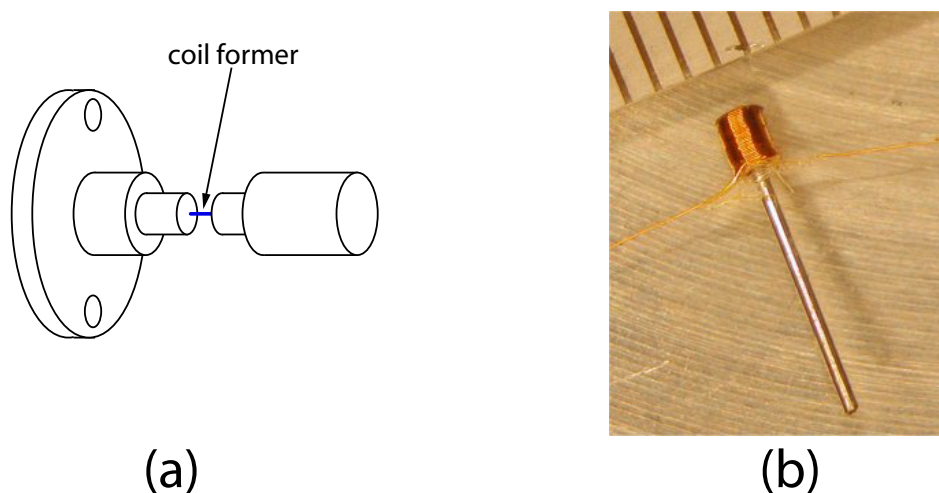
(a) A schematic of the PTFE jig used to hold the former for winding miniature coils, and (b) a miniature coil wound on a $250\mu\text{m}$ stainless steel former. The coil contains 214 turns in 8 layers. The divisions on the ruler are 0.5mm .
